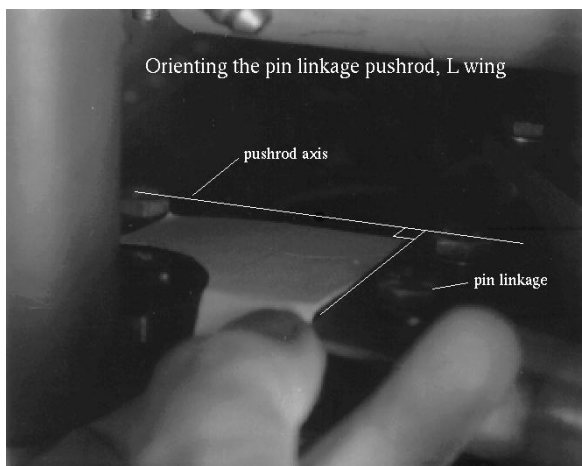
The pin linkage should be perpendicular to the pushrod when the pin is fully engaged.
